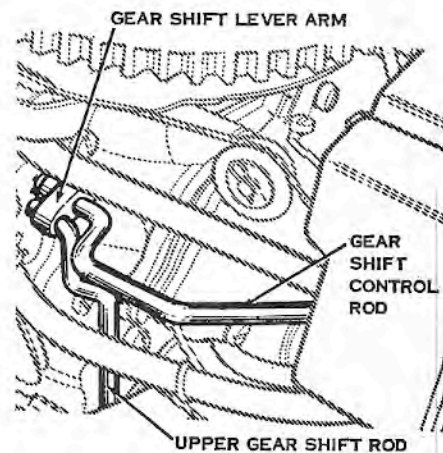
Adjust the gear shift rod coupling until the gear shift control rod is horizontal in the neutral position.
